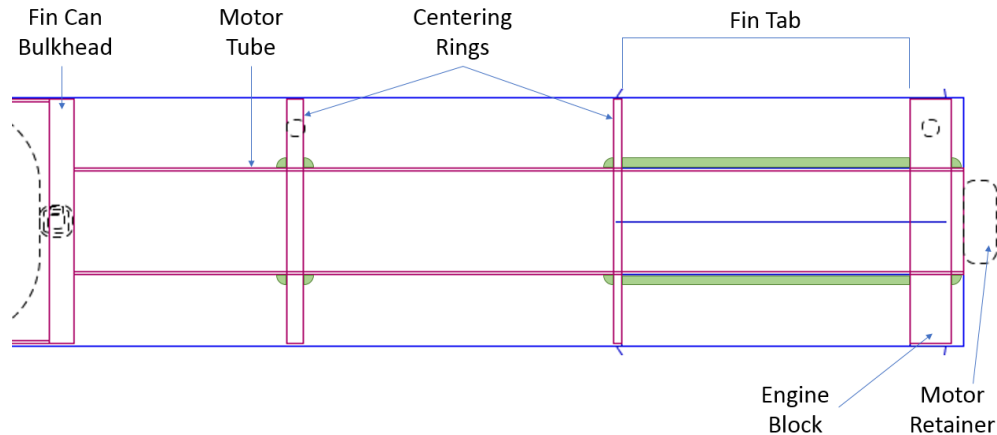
Motor Tube with Epoxy Areas Highlighted
